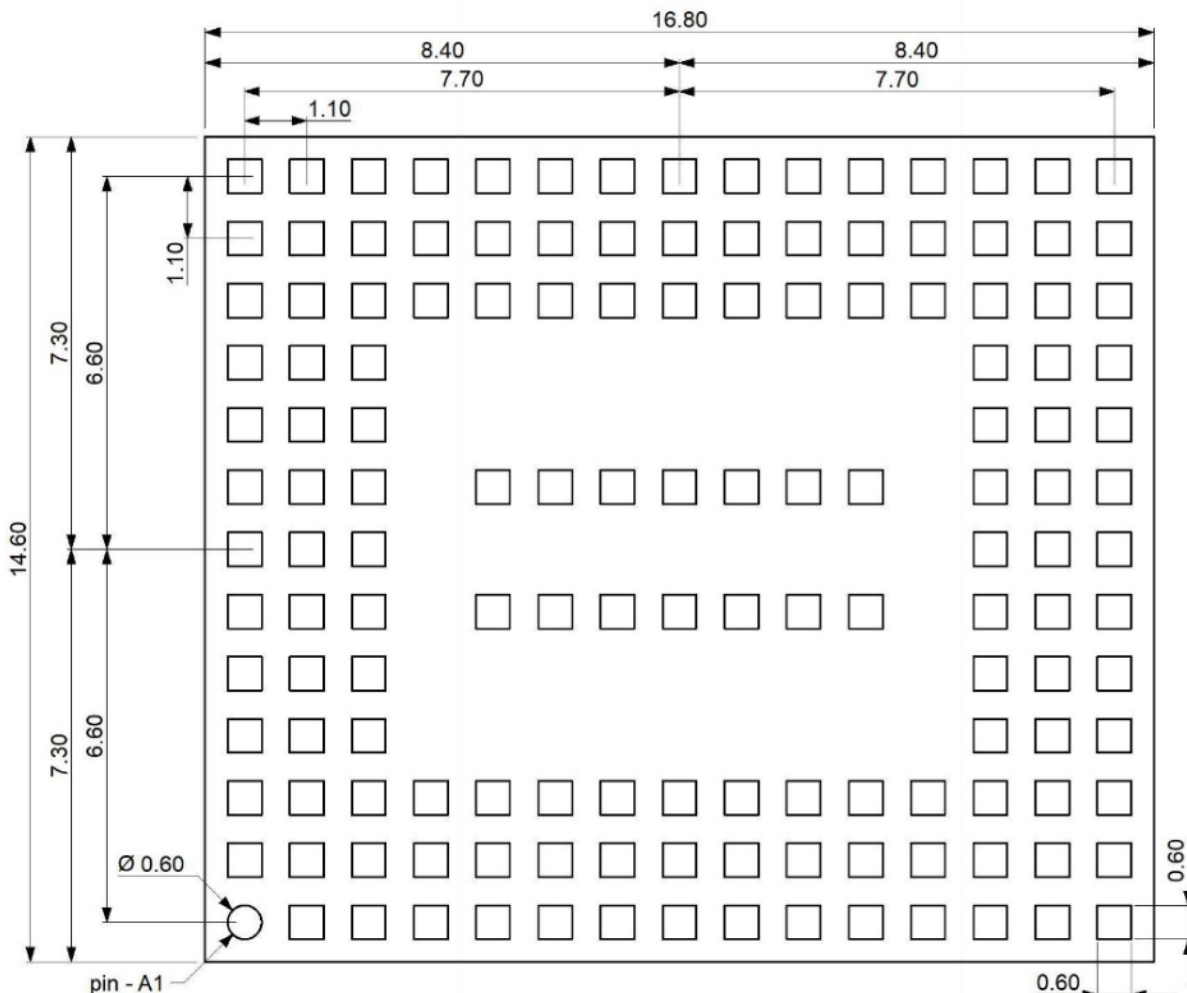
IRIS-W101 recommended PCB footprint (top view)
